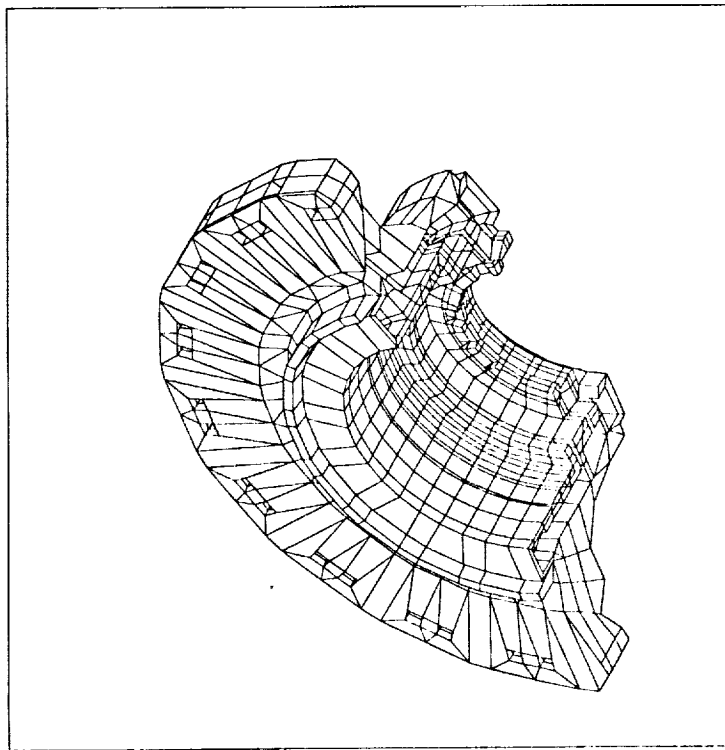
Cutaway view of HPOTP housing from pump toward to turbine end.
